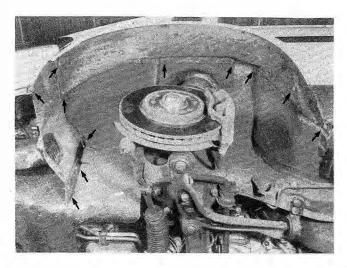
Wheelhouse liner mounting bolts (arrows).
